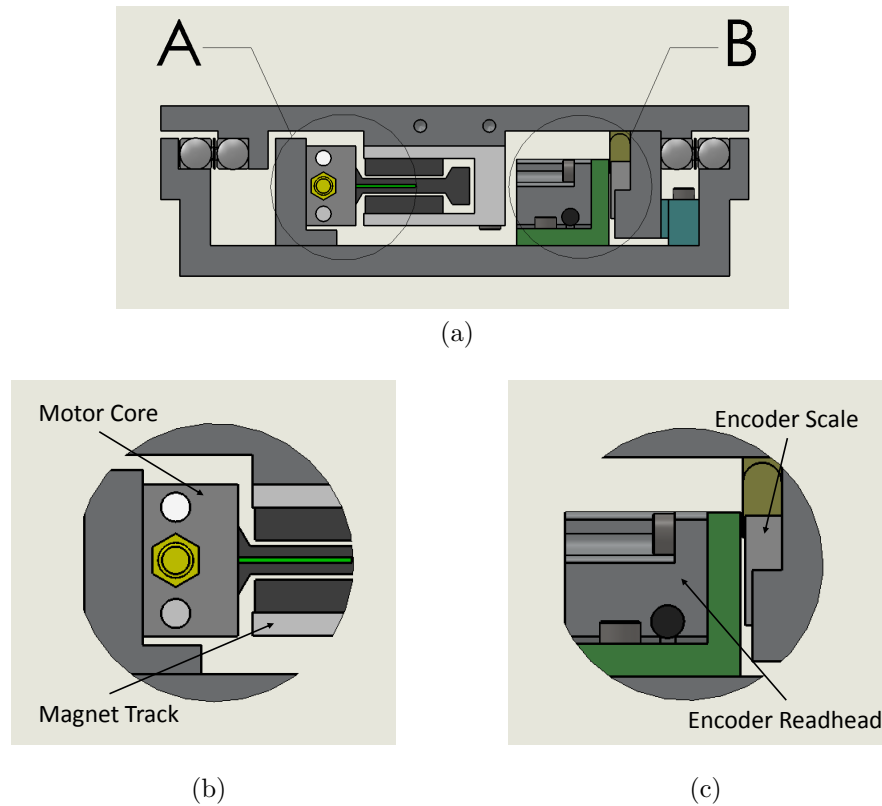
(a) Tolerance Critical Sections of Single Axis Slider with Detail Views of (b) Section A and (c) Section B
